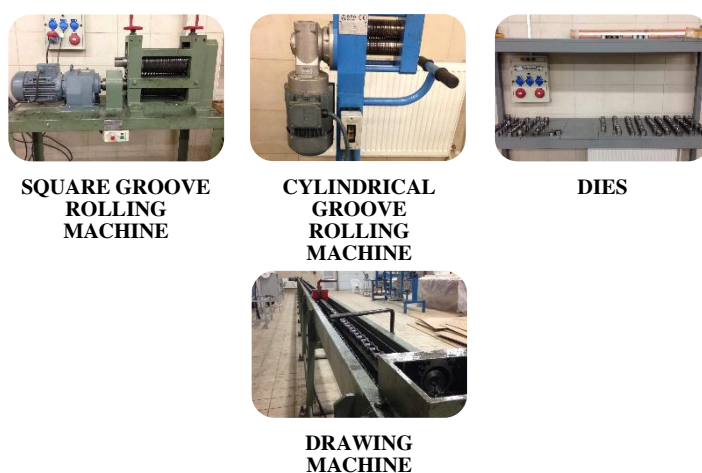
Dies with different internal diameters, two groove rolling machines and long wire drawing machine that are used for the production of wires.
